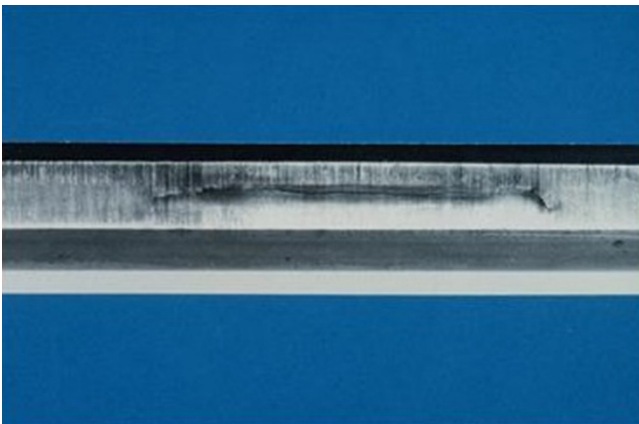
Tube-to-Tube Fretting Wear in a Power Plant Condenser.
